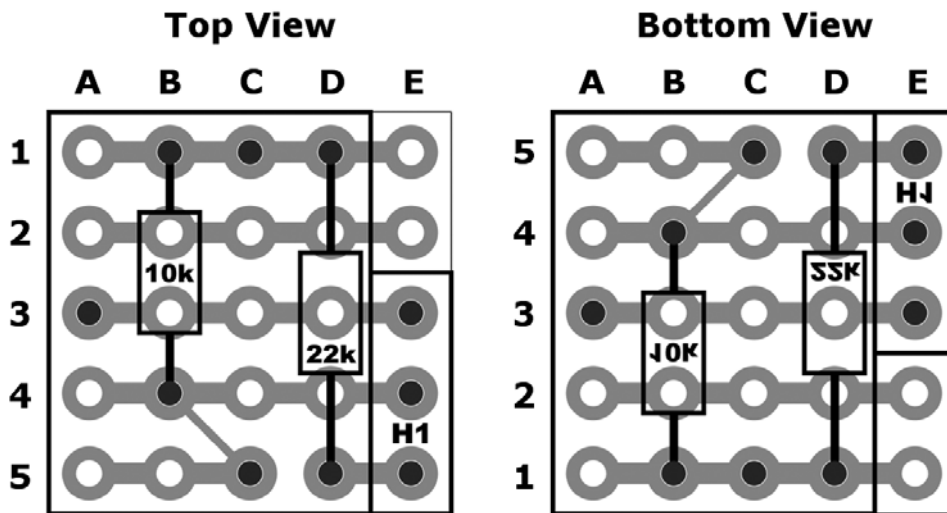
Top and bottom views of USB-PA3 stripboard layout
